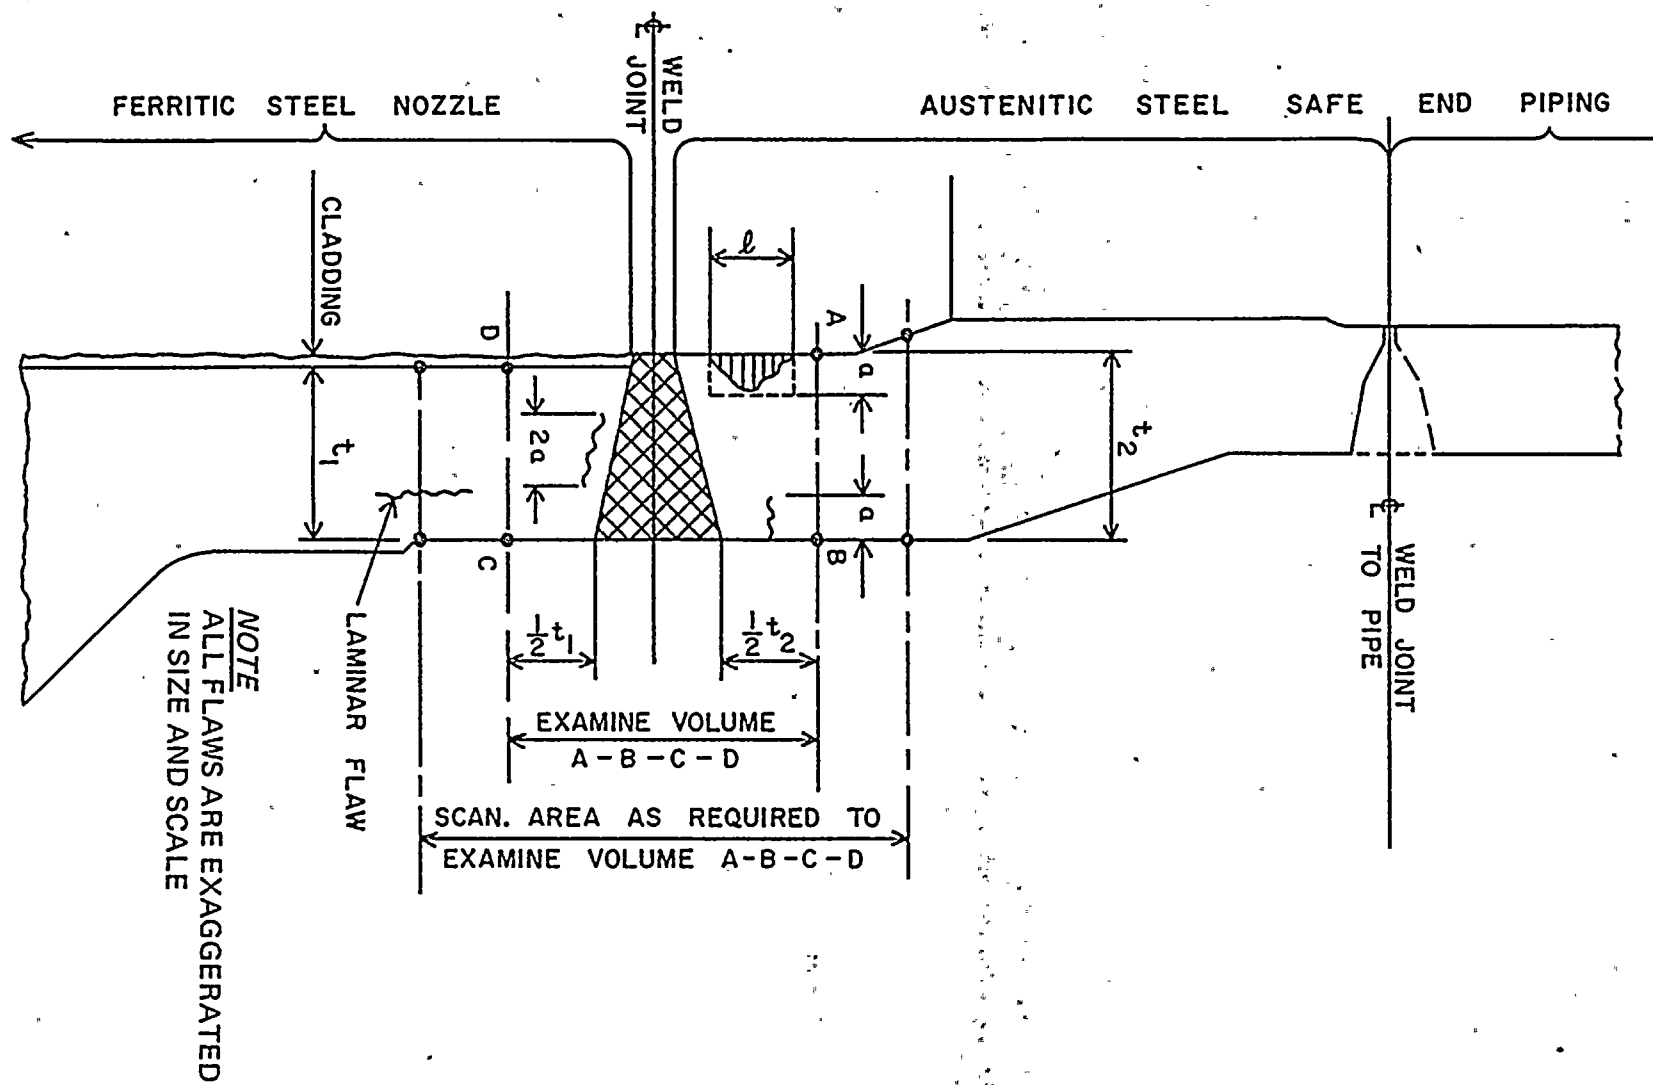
SAFE END WELD JOINT
